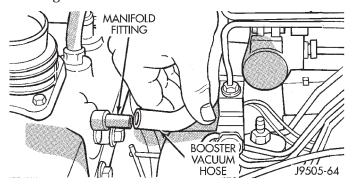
Booster Vacuum Hose Removal/Installation (From Manifold Fitting)
